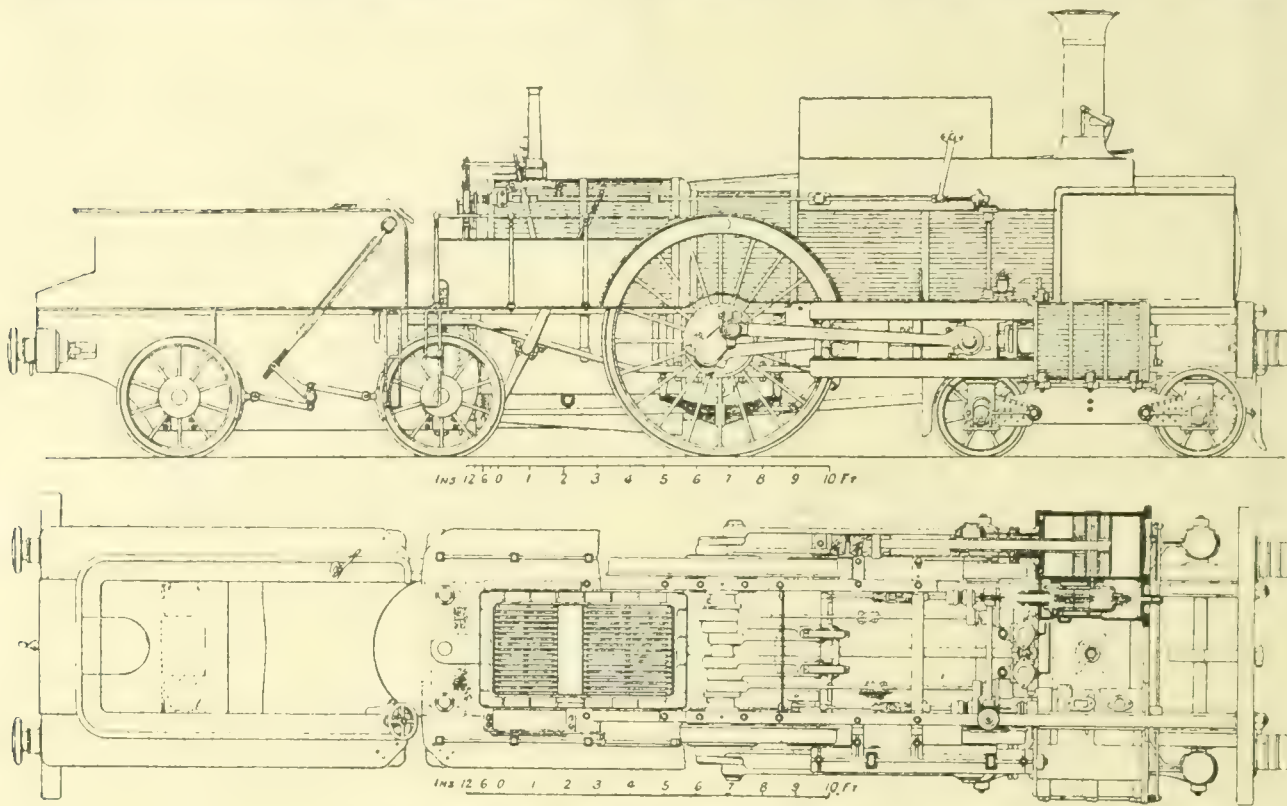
OUTSIDE 2-CYLINDER SINGLE DRIVER ENGINE.
